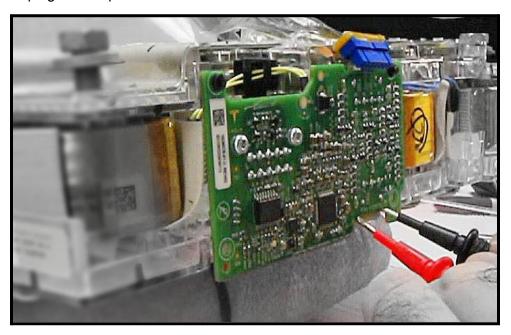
Using multimeter probes as a tool to pry the ribbon connectors out of the old board.
